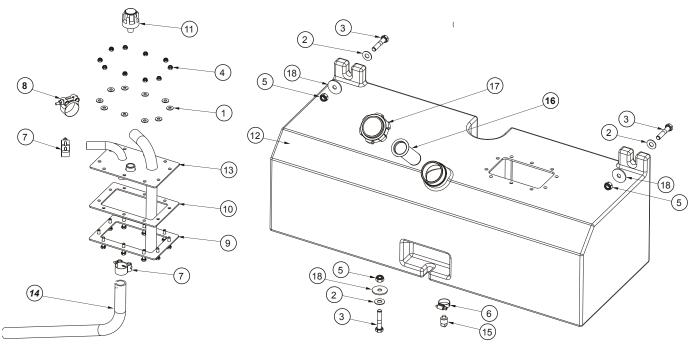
Hydraulic oil tank assembly of SL26/30SL
